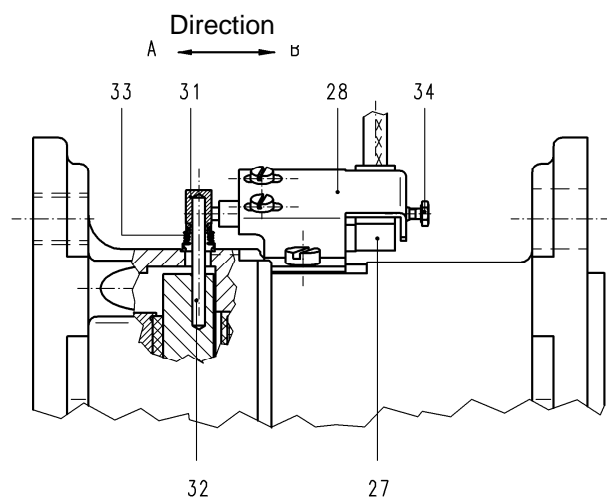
/2: Microswitch installation on spring-applied single-disc brake module 77 500..B15
